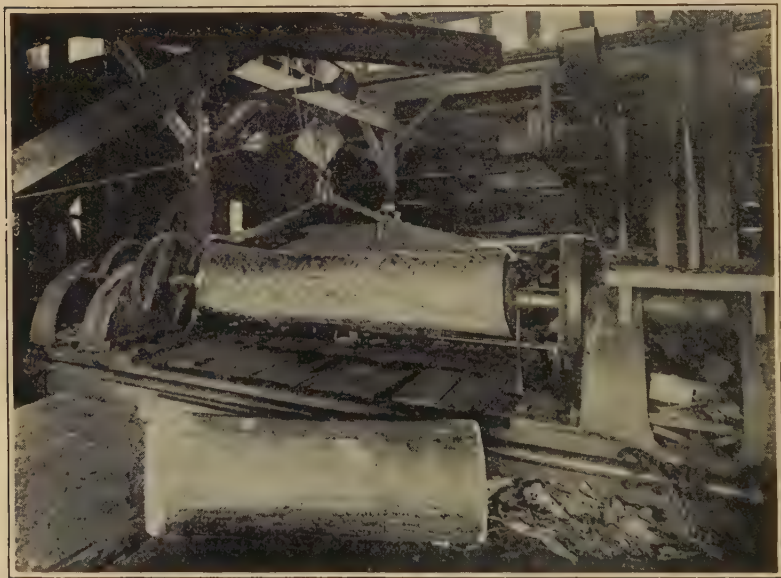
Rotary veneer machine. Looking toward the front of the machine showing peeled log set in machine ready for cutting. The log is revolved against a knife which pares off a continuous sheet of veneer. (Photograph by American Walnut Manufacturers' Association, Chicago.)
